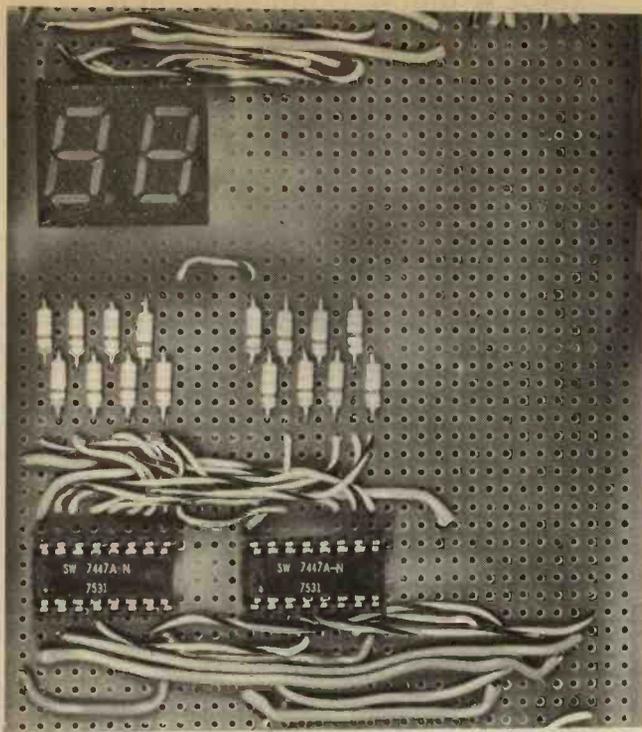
Component layout for the display logic. A photo of the prototype is shown above. For assembly details Fig. 5.3 should be referred to
